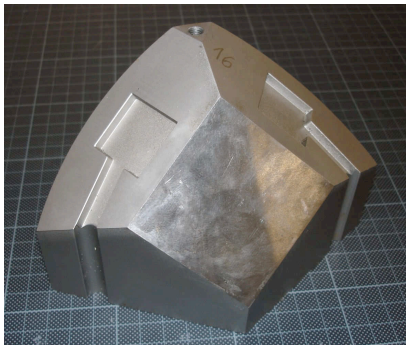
Single tool steel wedge with wiring channels for calibrations.
